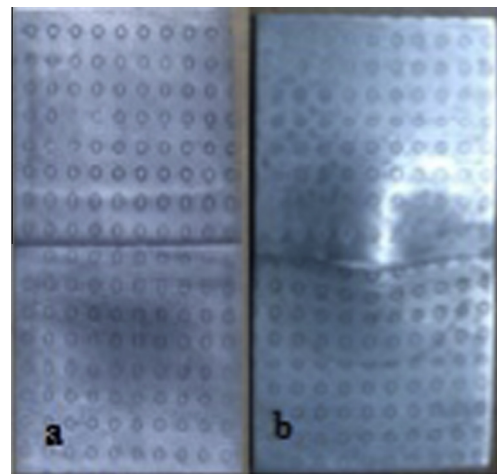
Tailor welded blanks (a) before forming and (b) after forming.
